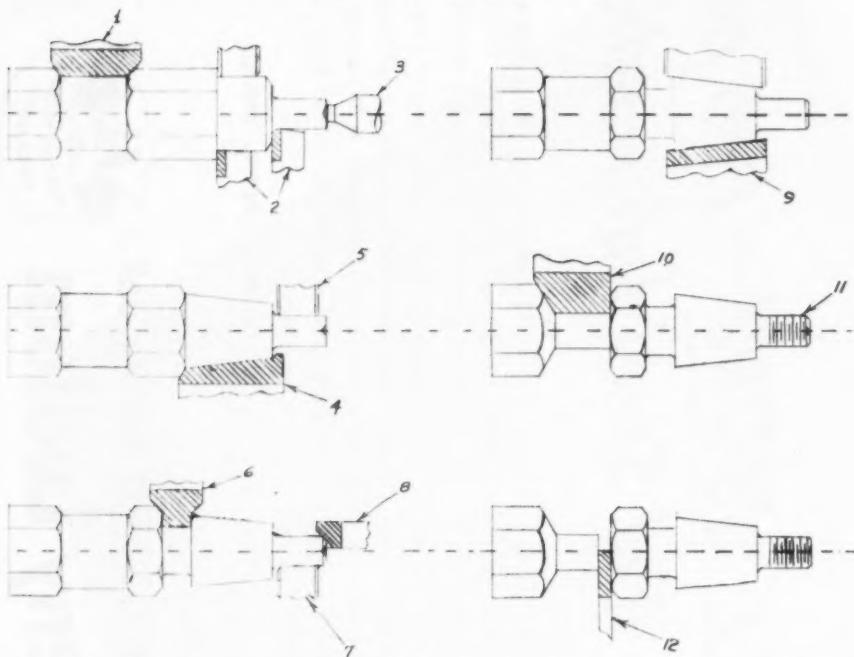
Spindle and tooling setup for 6-spindle automatic for producing oil shutoff valve. Cross hatching shows carbide tipped cutting tools at the six spindle positions: 1. form; 2. two-tool roll turner; 3. spot drill; 4. finish form; 5. roll support; 6. finish form groove; 8. butt face, shank type; 7. roll support; 9. shave attachment; 10. radius form; 11. threading attachment; 12. cutoff.
